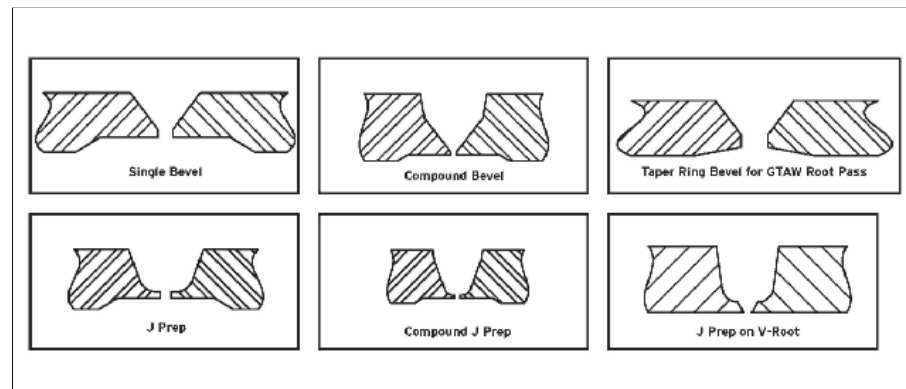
Typical weld preparation profiles. Many profiles are only achievable by machining.
